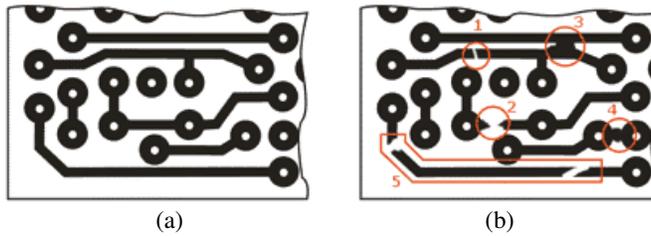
(a) Standard PCB. (b) Inspected PCB with fatal errors.
